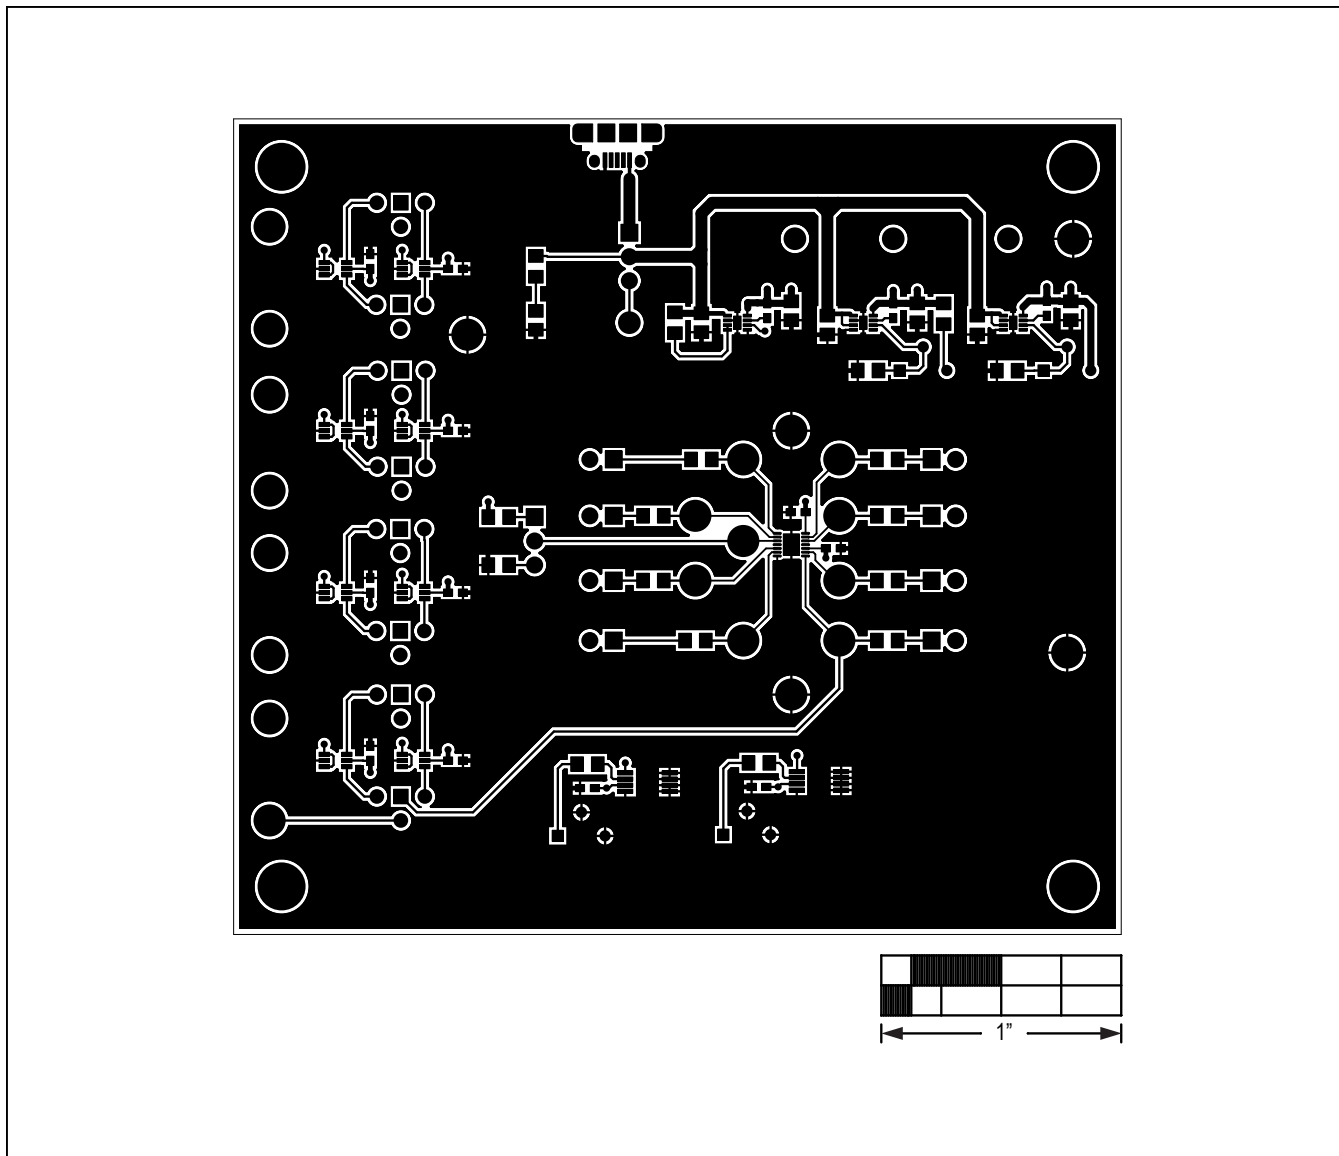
MAX14611 EV Kit PCB Layout—Component Side
